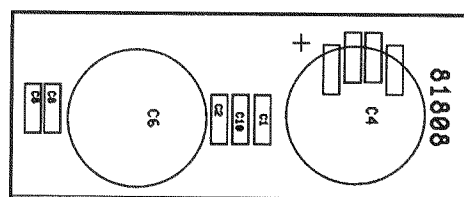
LOAD SHUNT BOARD COMPONENT LAYOUT TOP SIDE
